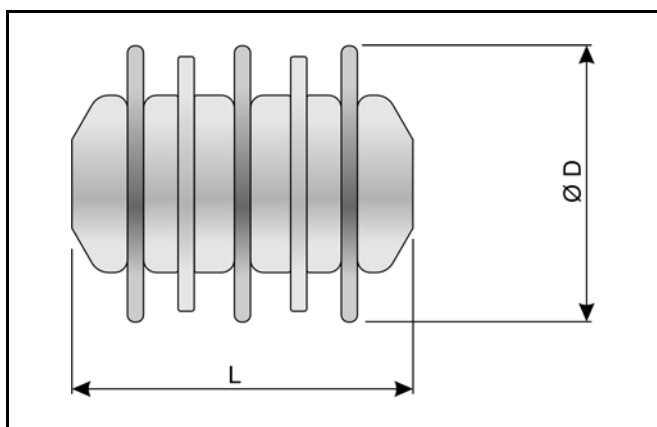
Dimensional drawing of the TWIN 5 pig
